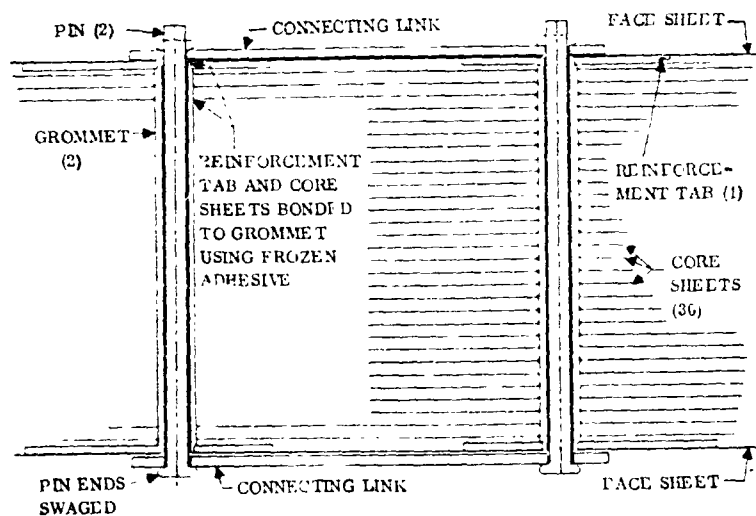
Initial Experimental Twin Pin Fastener Assembly
